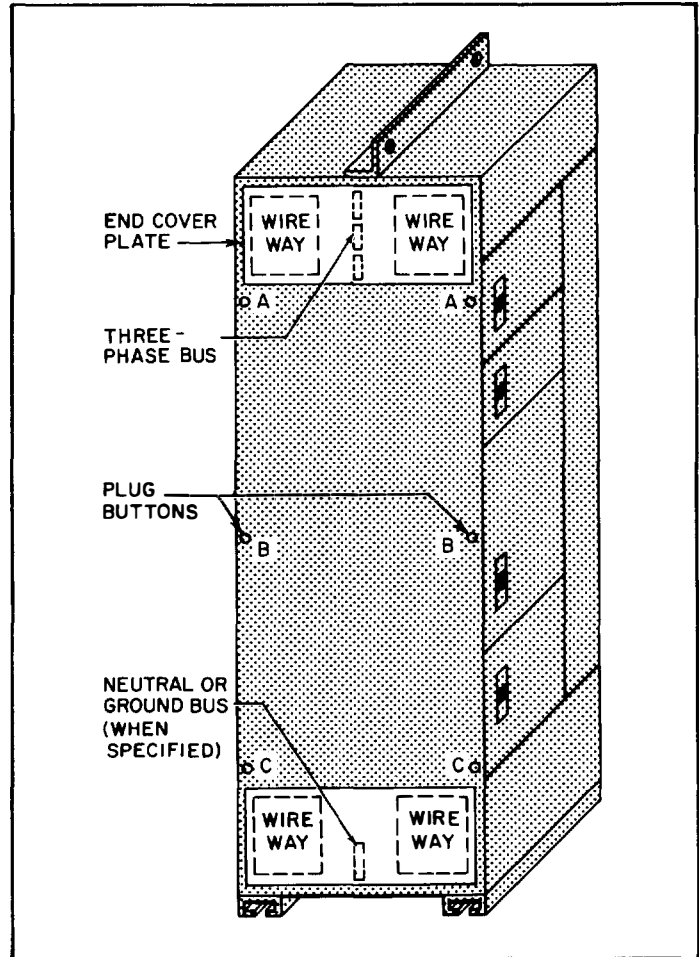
Side view showing cover plates, plug buttons and joining points for 20-inch (508 mm) deep section.
